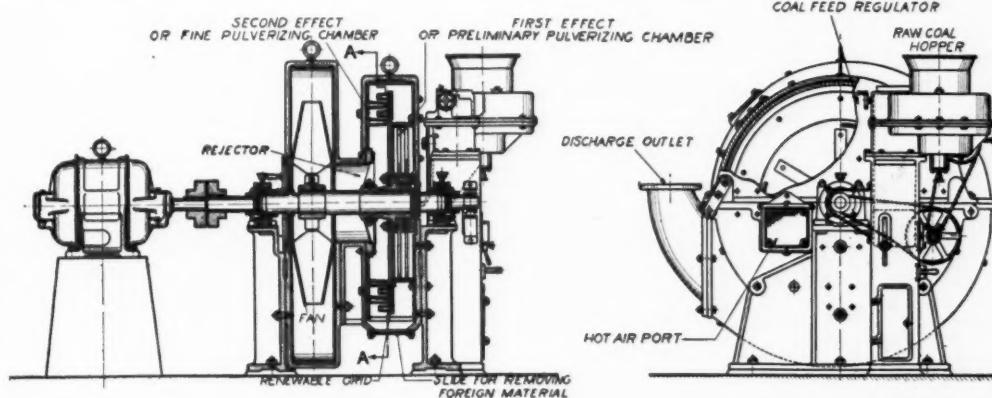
Detail view of the Atritor unit system for pulverized coal. The main shaft of this machine is equipped with roller bearings. The Dot system of high pressure grease lubrication is employed on all bearings.
